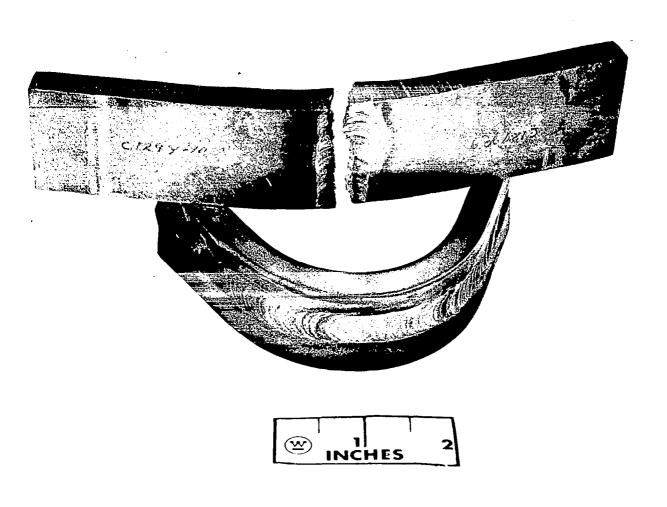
Plate Weldments Bend Tested at Room Temperature
